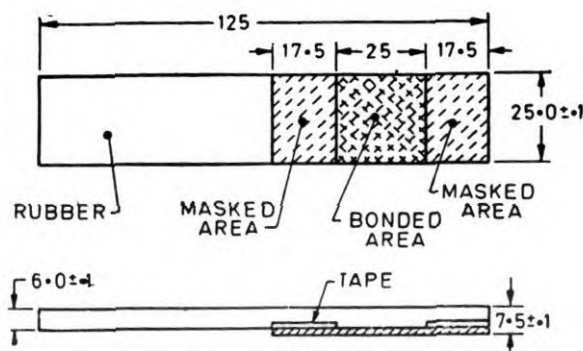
TEST FIXTURE FOR THE ADHESION TEST
